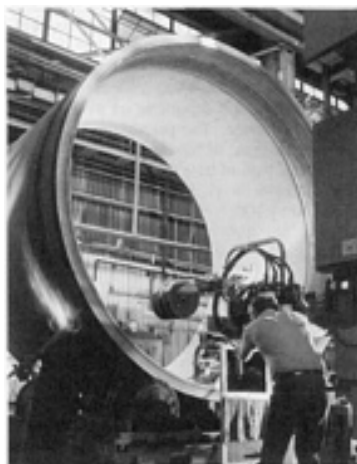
PLASMA ARC HOT WIRE PROCESS FOR WELD CLADDING THE INTERNAL SURFACE OF A PRESSURE VESSEL SHELL. COURTESY OF NOOTER CORPORATION
